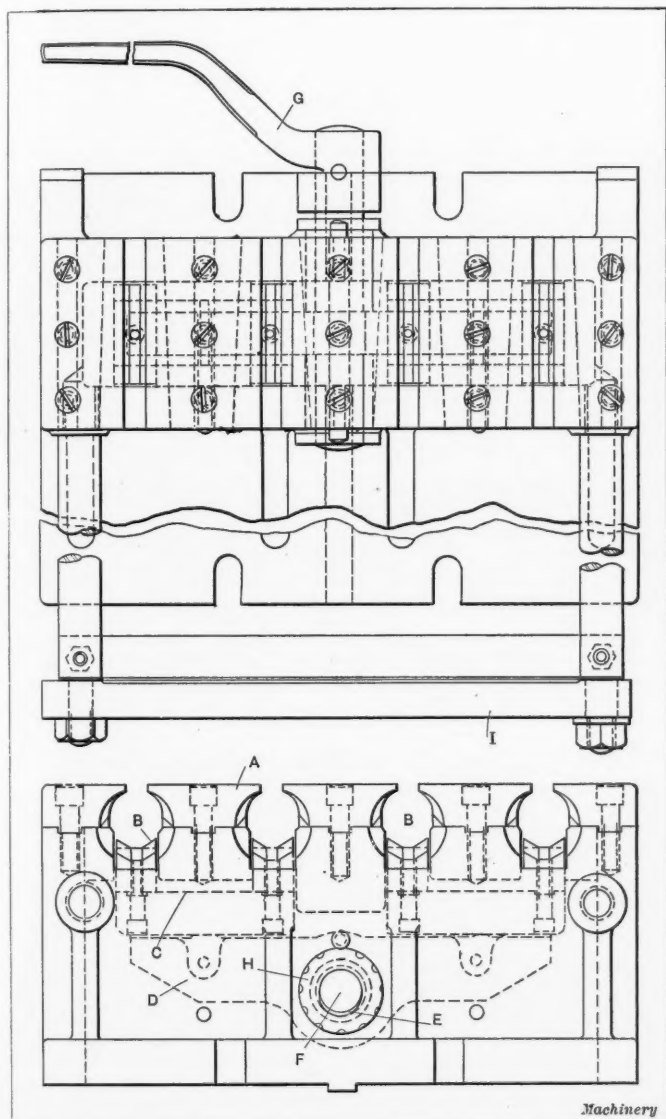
Details of Keyseating Fixture used in holding Live Axle Shafts for cutting the Keyway in the Tapered End
